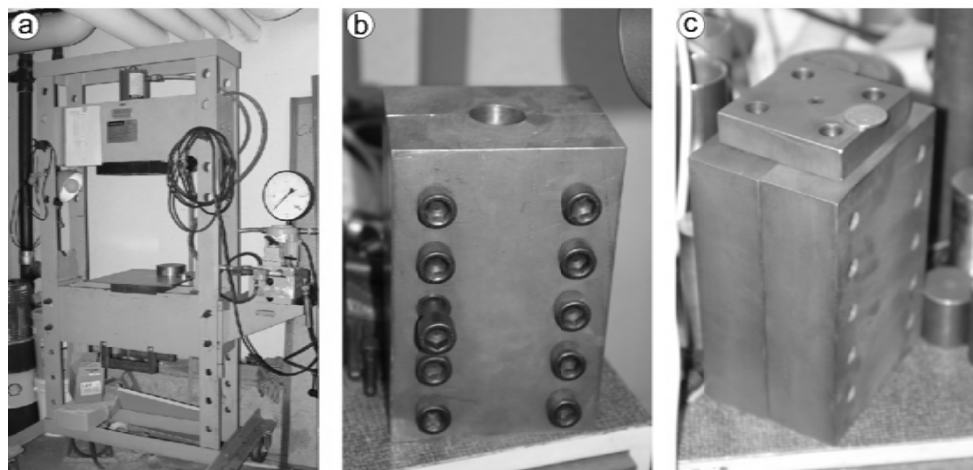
a) ENERPAC cold pressing rig. b) and c) Steel parts used for enclosure of the cylinder containing the cold pressed starting material.
